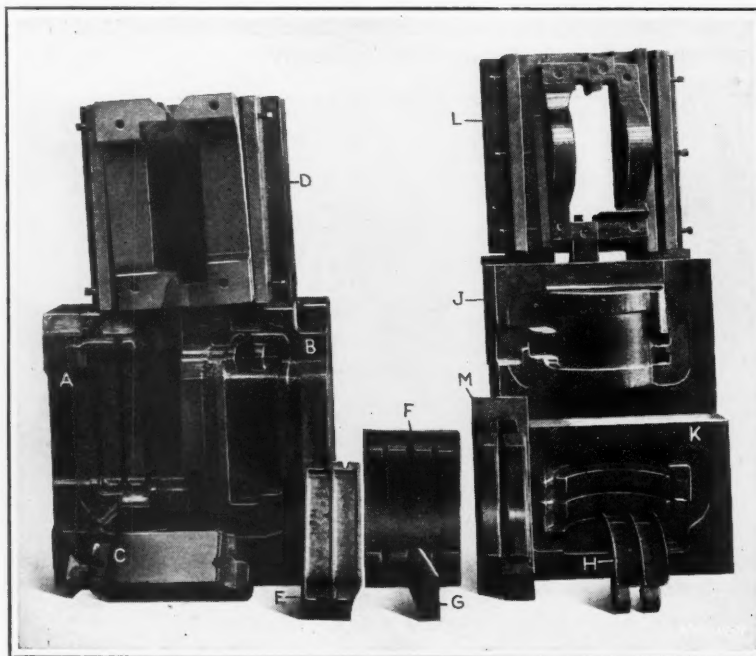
Dies for Drop-forging the Brake-shoe shown in Fig. 3
